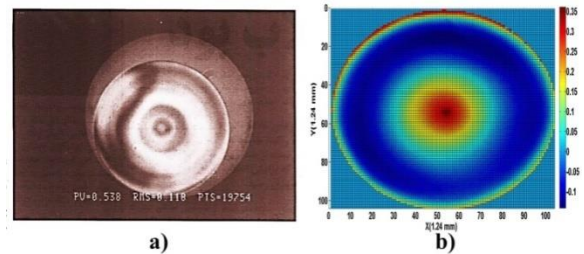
a) Initial surface fringe measured by interferometer, b) initial surface profile
